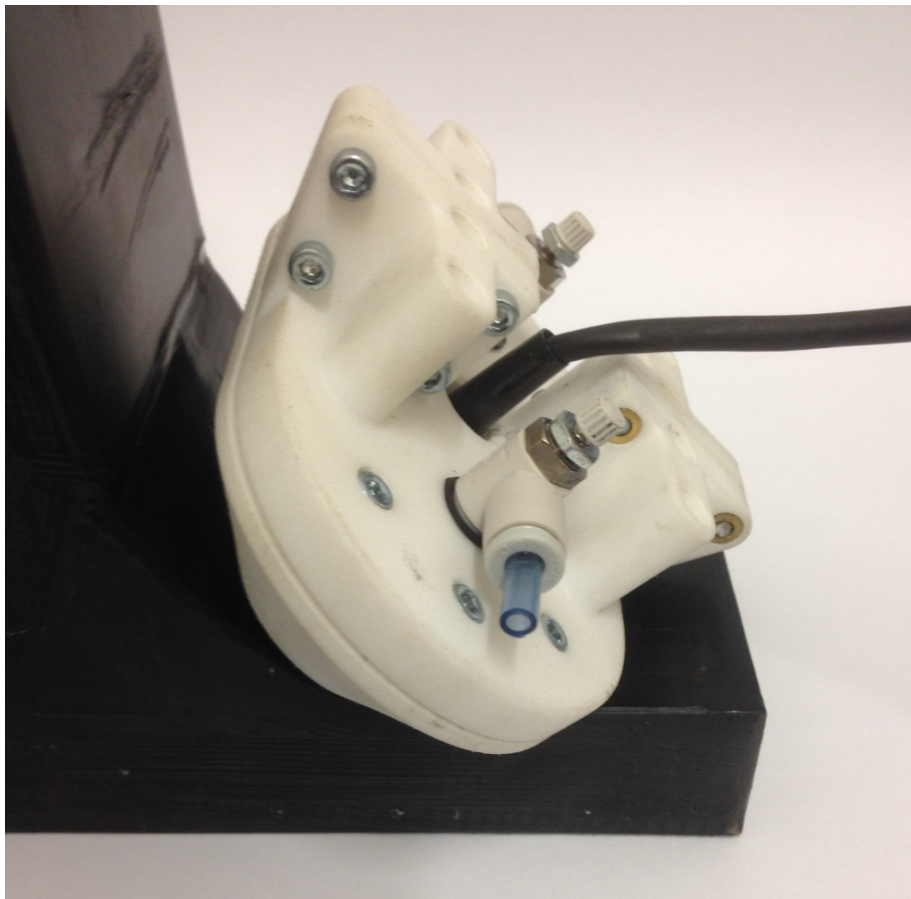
Fillet weld water wedge assembly positioned on tank base fillet weld
